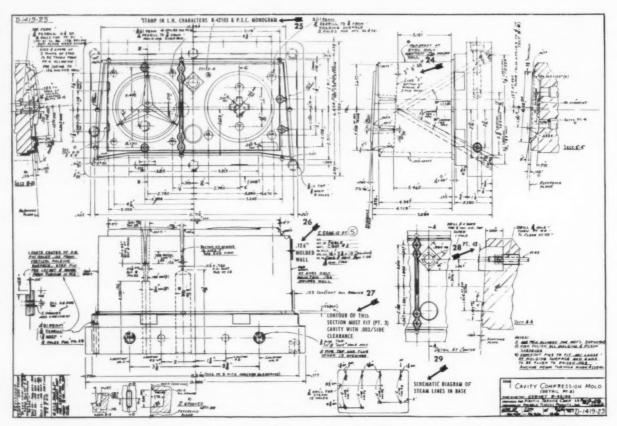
Mold designer's detailed drawing of the complete force plug for the radio cabinet; arrows point to helpful notes to mold maker
